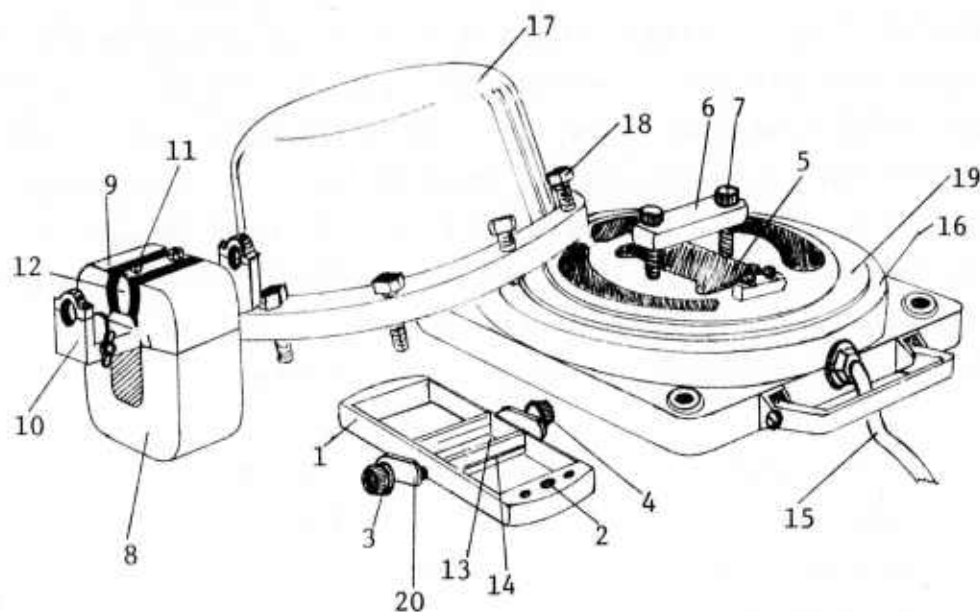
Schematic drawing of the VBP-3 seismometer [6]
